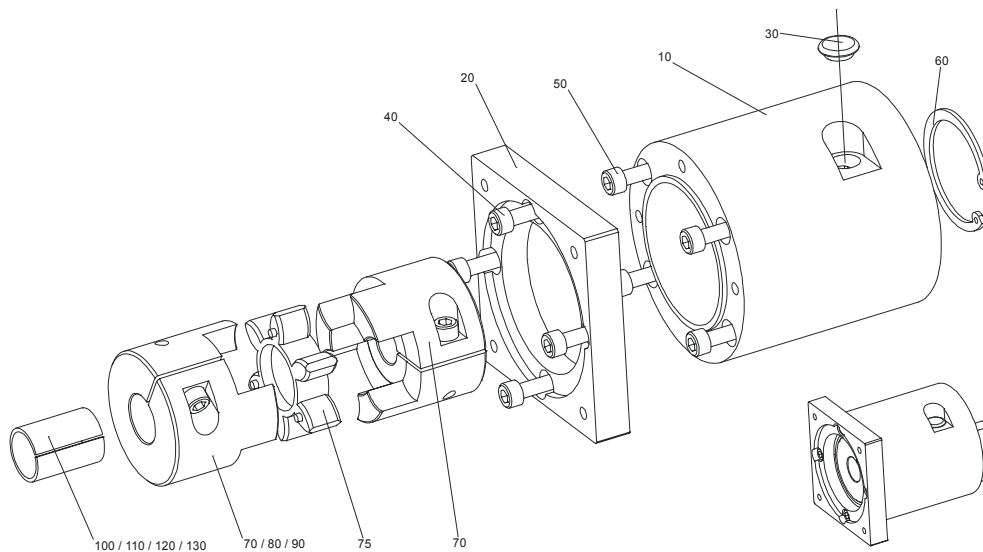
Module 160/15 Flange i=1:1, Part group No. 1000476
